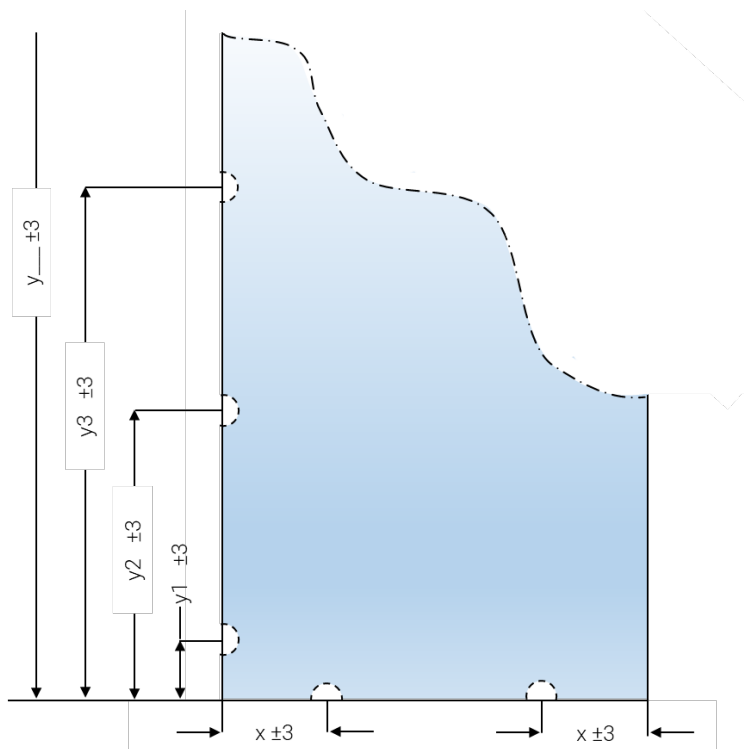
tolerances of the segment cutting for a glass thickness of 10 mm (dimensions in mm)
